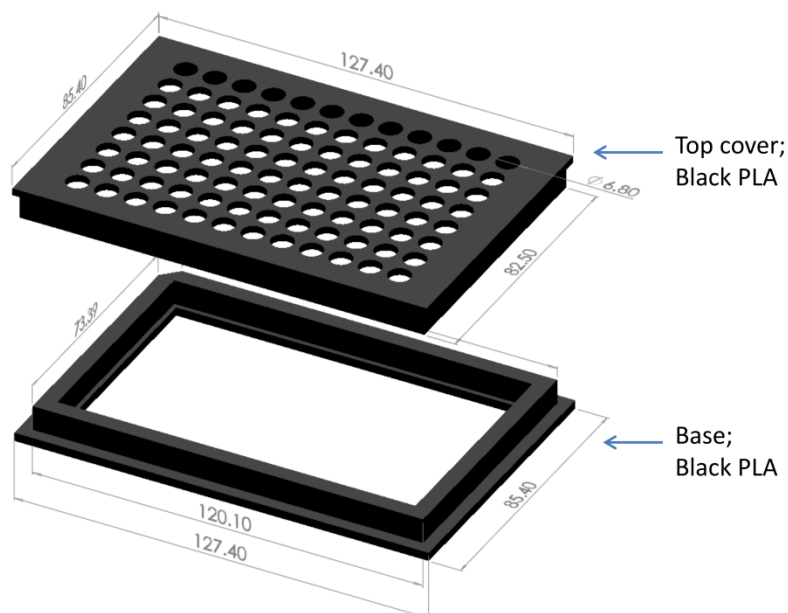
A plate holder for the paper-based well plate. Base and Top-cover were designed using SolidWorks® 2013 and printed using 3D printer Ultimaker2.
